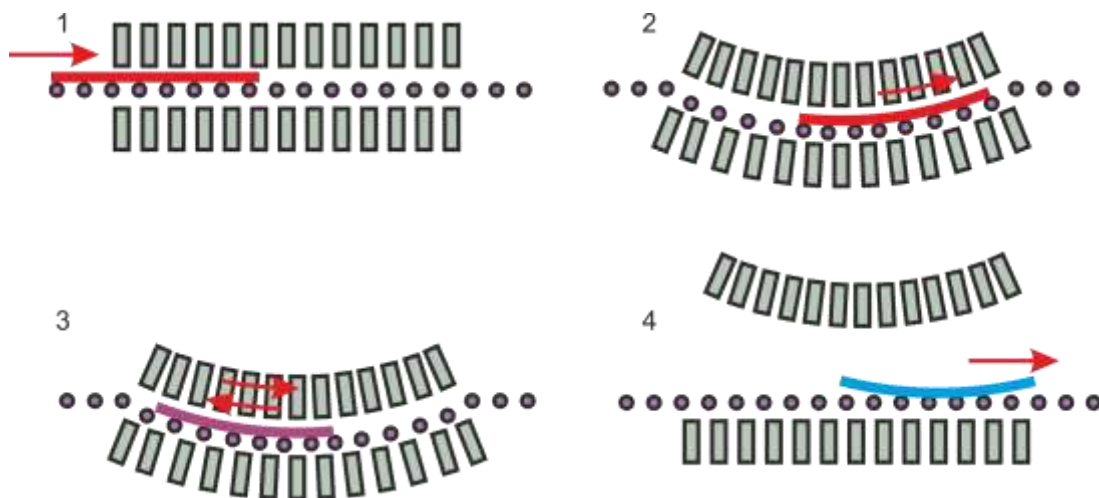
Diagram of forming glass with one radius of curvature in a furnace without moulds (forming axis across the movement of the conveyor): 1 - supply of flat blank, 2 - forming by readjusting the flexible conveyor, 3 - cooling in reciprocating oscillating movement of the glass, 4 - setting the roller conveyor into a plane and moving the formed glass into the annealing section
